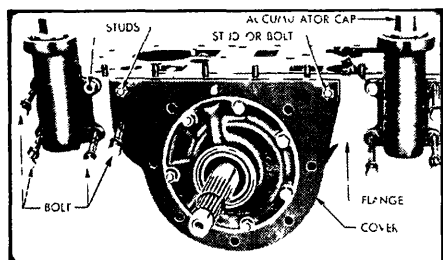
Accumulator body and reaction shaft flange attaching screws
